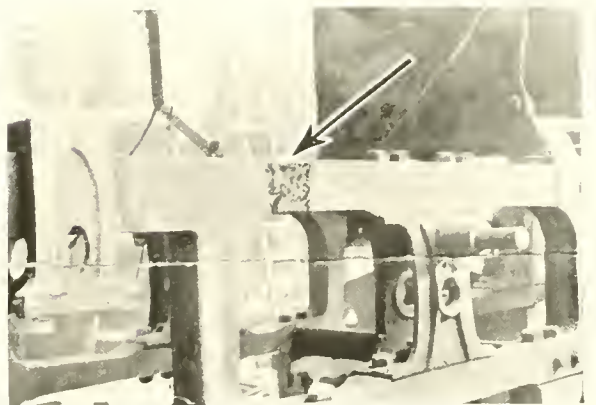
Engine Frame repaired by the Lincoln Arc Welder at the Rock Island Shops.
